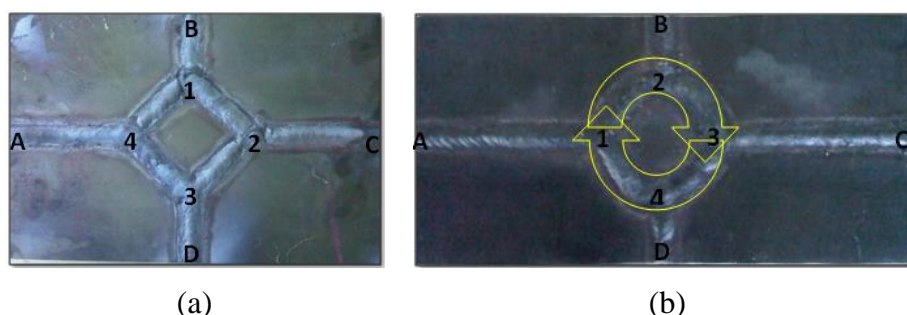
Two types of welding routes on the test plate material: (a) Welding route for diamond plate, and (b) Welding route for circular plate.
